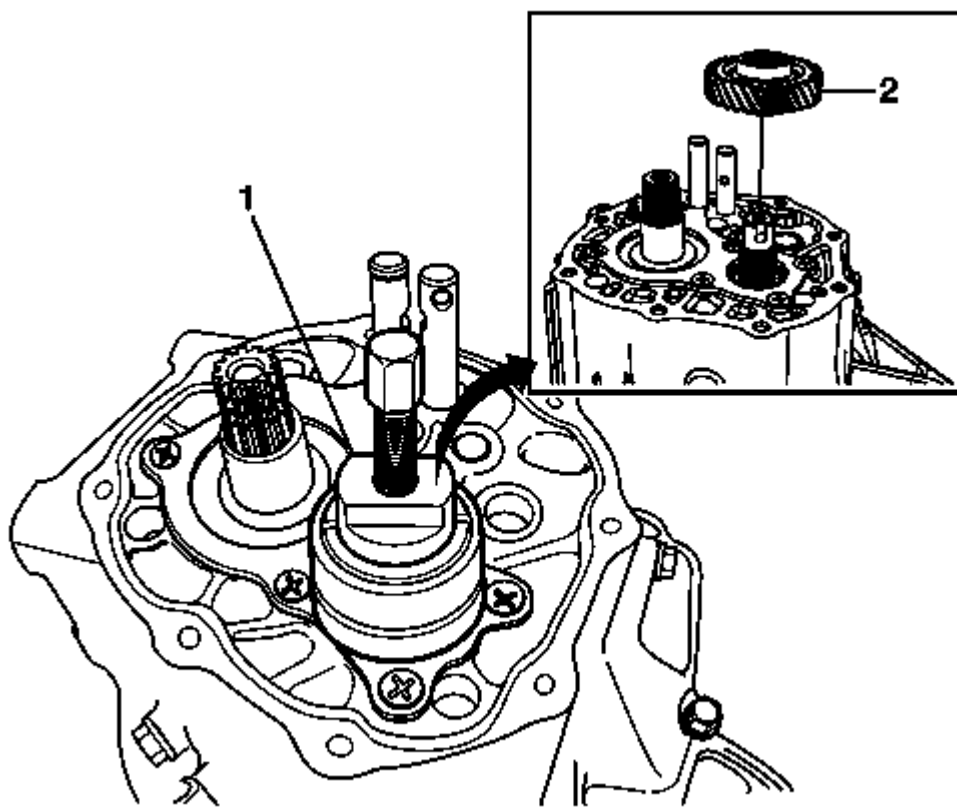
View Of DT-46554 differential bearing puller and plate adapter kit
